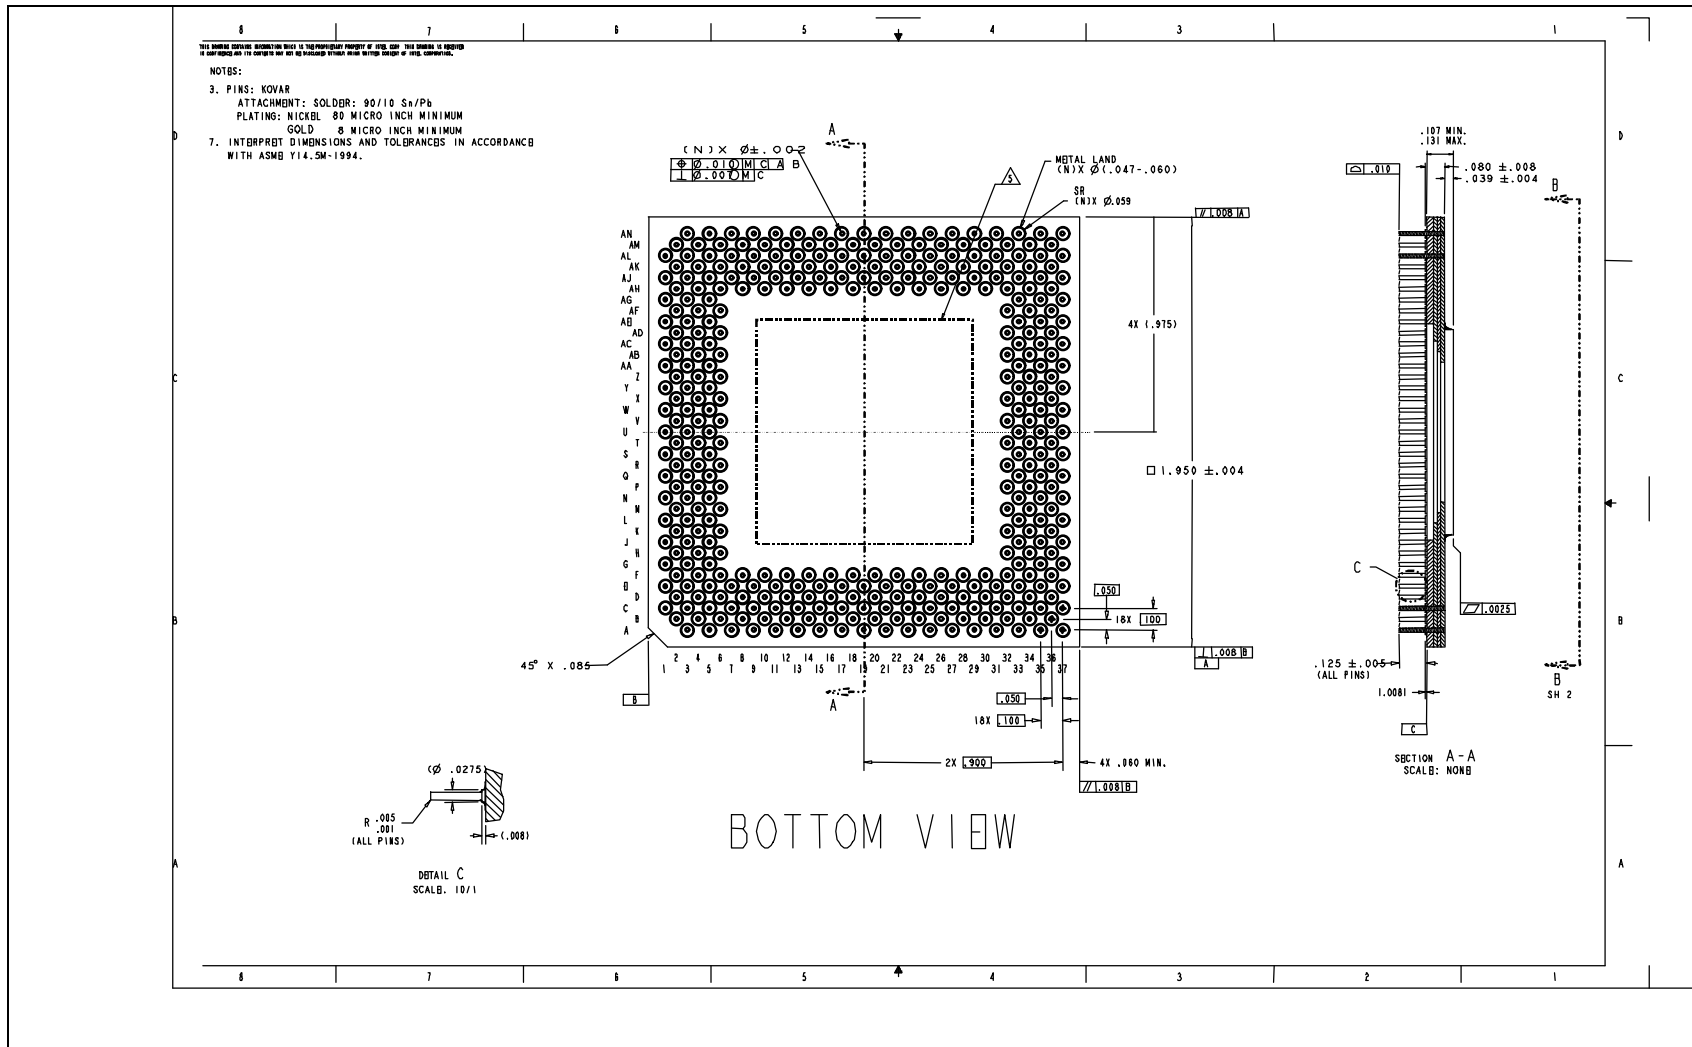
Outline of the processor packages that can be used with the 370-pin socket
